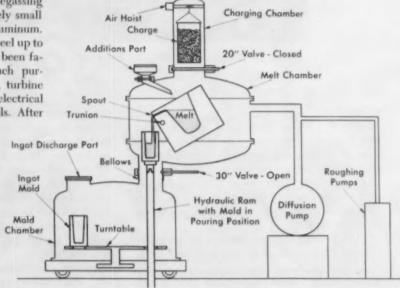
Diagram Showing Components of the Vacuum Furnace at Carboloy Div., General Electric Co., for Charging, Melting and Casting 1000-Lb. Melts, One Following Another
